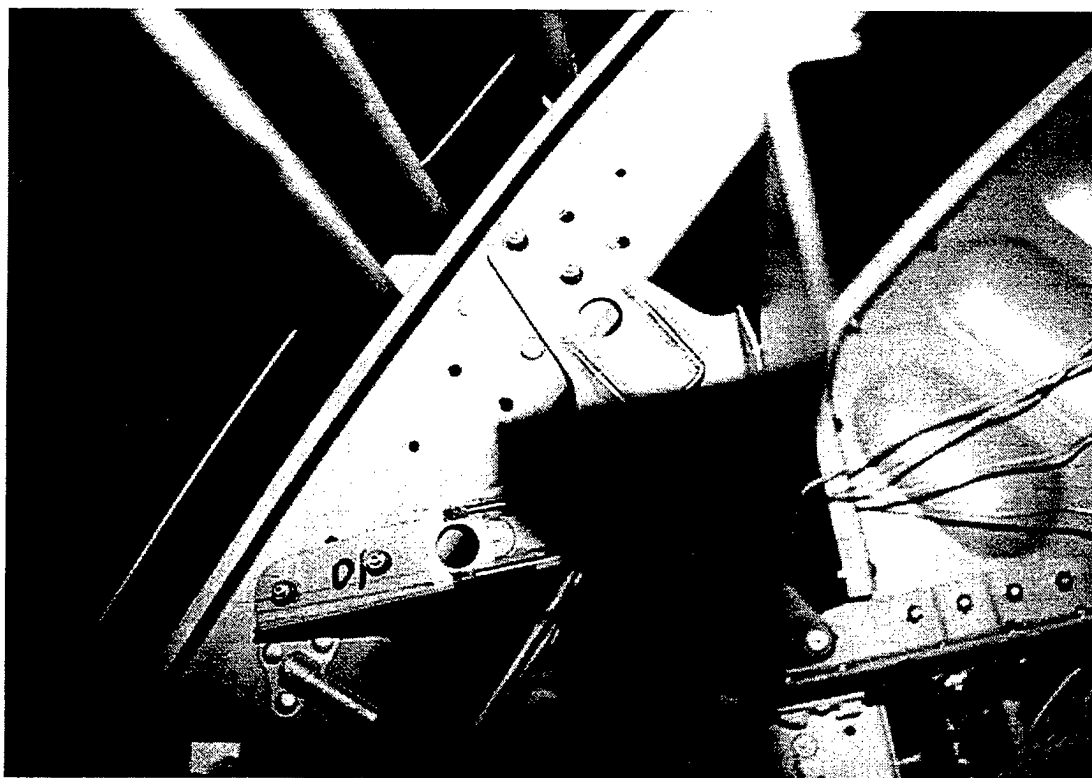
PRETEST BIN B ATTACHMENT SUPPORT NO. 10 FRONT VIEW
